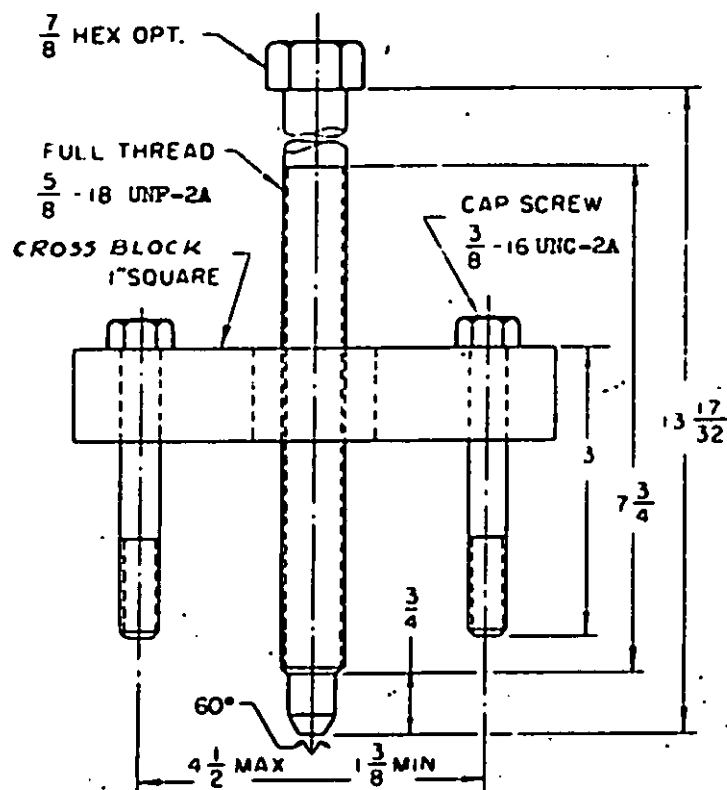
Type VIII, puller, mechanical, gear and pulley.
